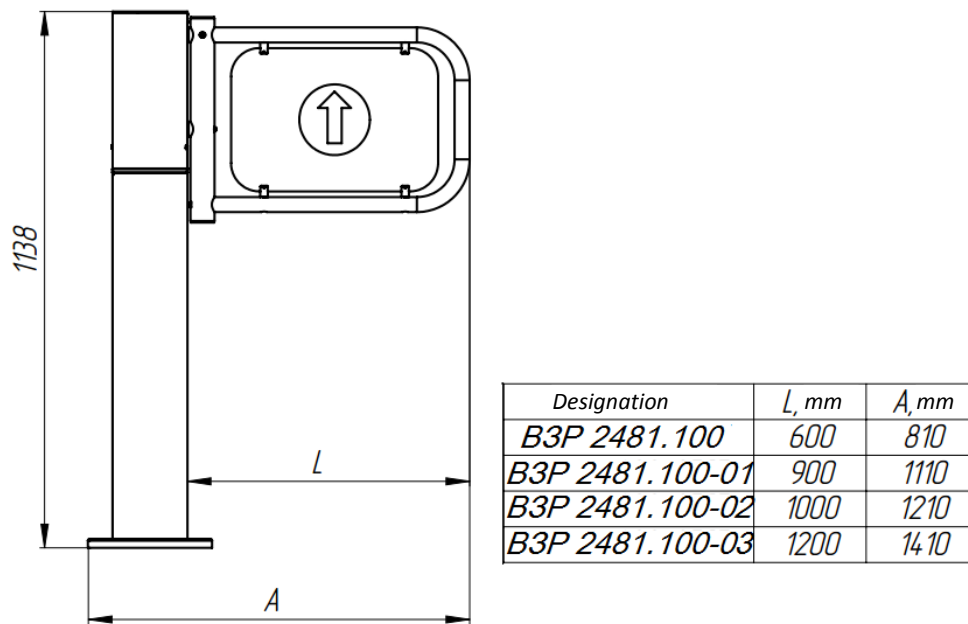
Overall product dimensions for a gate with a metallic tube flap.
